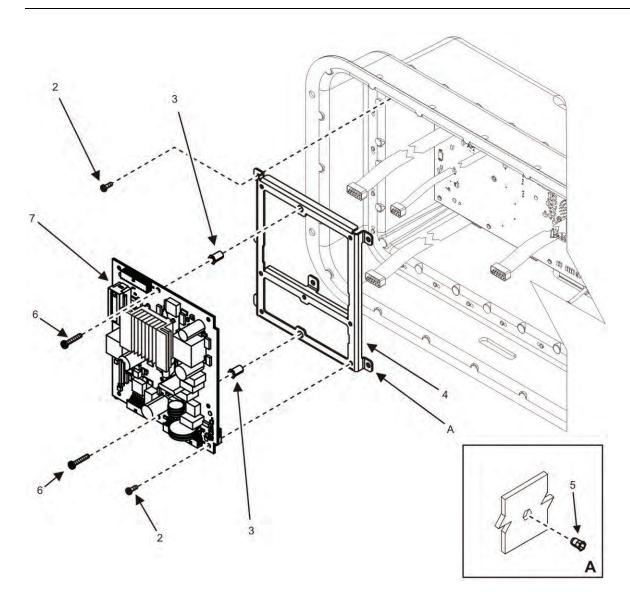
DCS Enclosure Assembly (Sheet 2 of 3).
